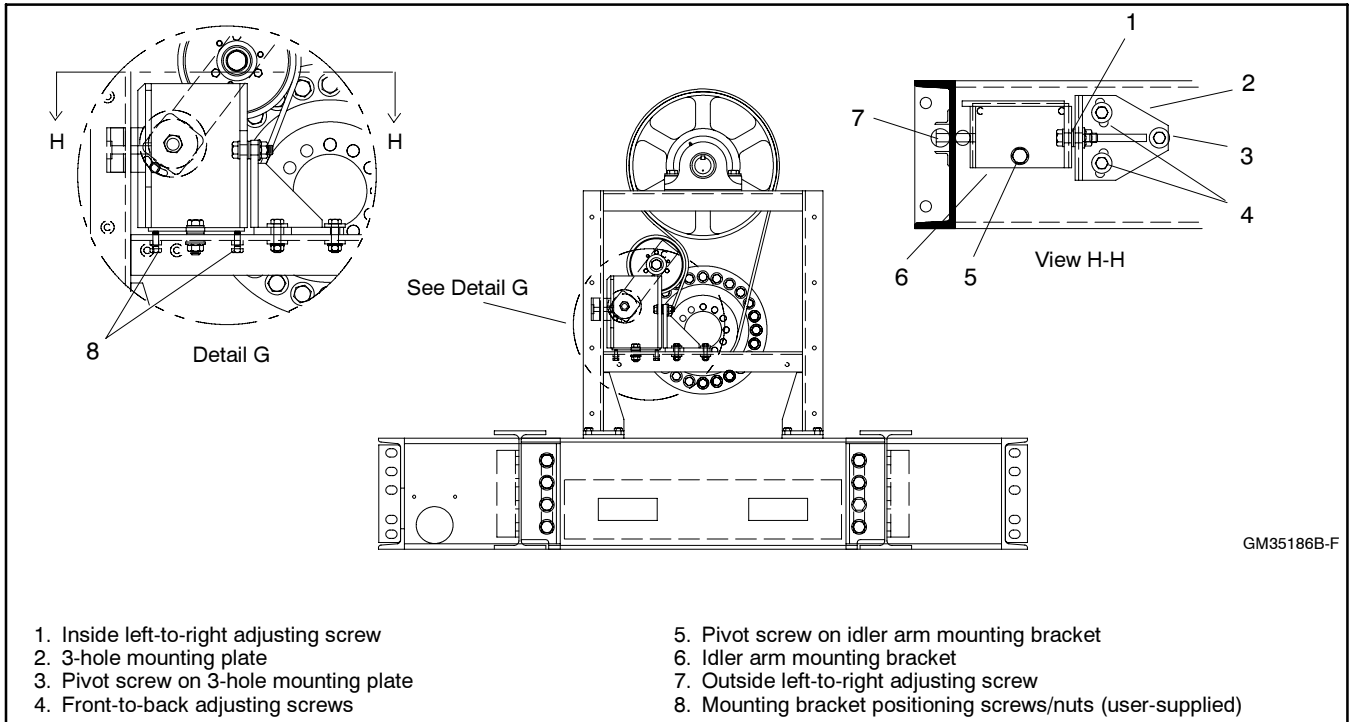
Idler Pulley Arm Bracket and Plate Adjustment
